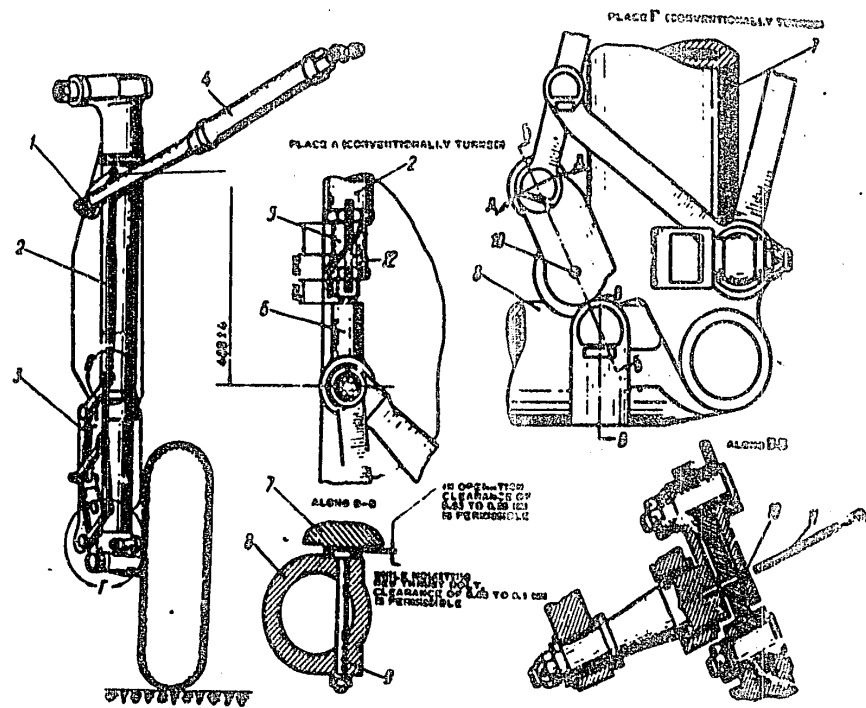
L.C. MAIN STRUT WHEEL TURNING MECHANISM ASSEMBLY
